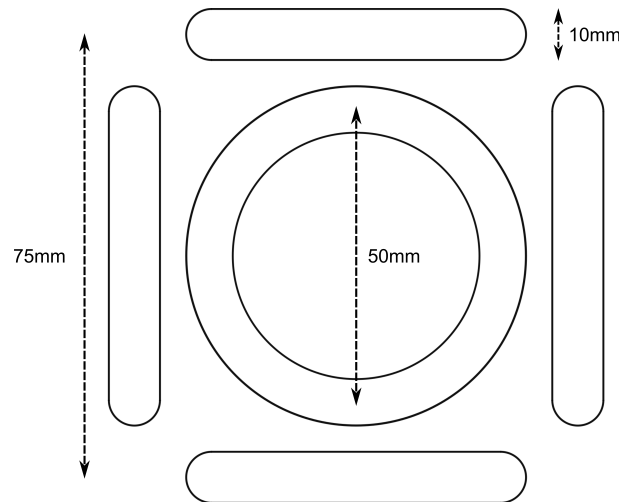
The WB6-mini construction dimensions. The joining pipe sections at the coil edges are not shown for clarity. This design has a spacing factor of  $s = 1.5$ .
